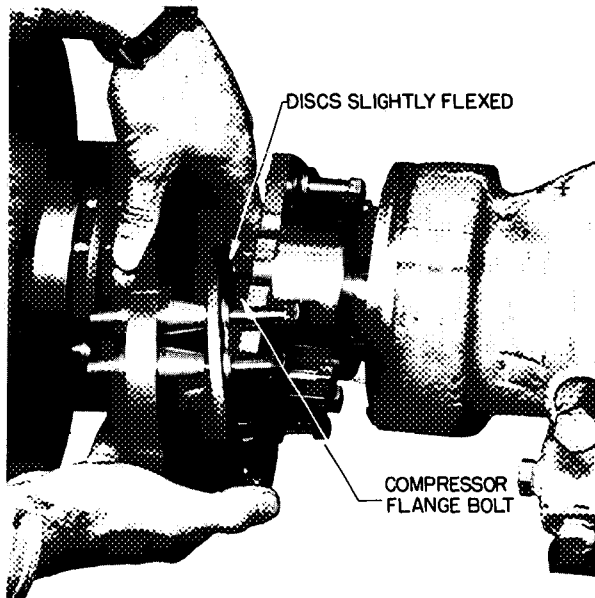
Installing 5H80-623 Coupling Center Plate Assembly
